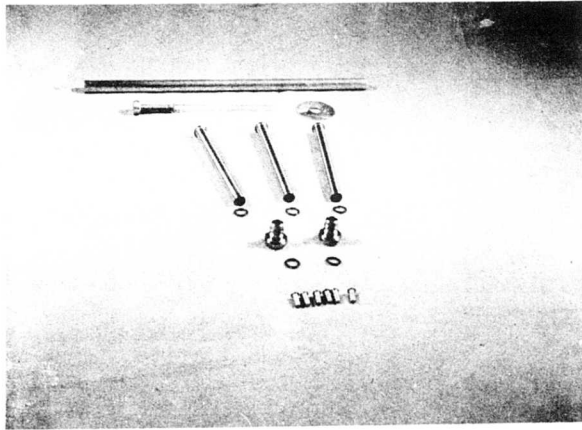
COMMON PARTS AND ASSEMBLIES OF THE QKA853
